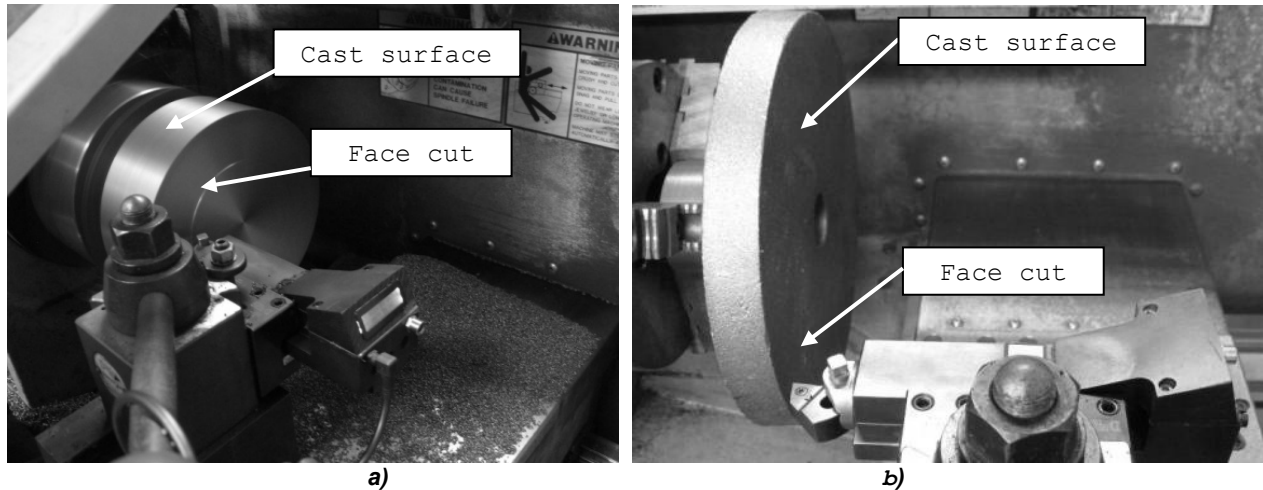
Face machining with cutting tool force measurement: a) continuously cast bar and b) sand cast AFS Cast Iron Division disc.
